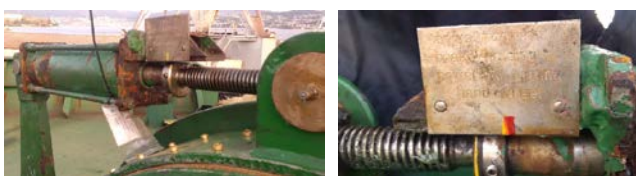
Nut-spindle-rod-cylinder with spring where the indicator ring and the fixed plate for adjustment are shown (left), and indicator ring position adjusted after the test to the permanent mark on the fixed plate (right).
